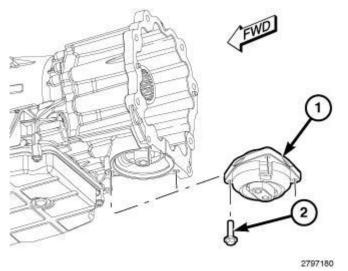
Rear Engine Mount Isolator & Bolts (4x4) Courtesy of CHRYSLER GROUP, LLC
